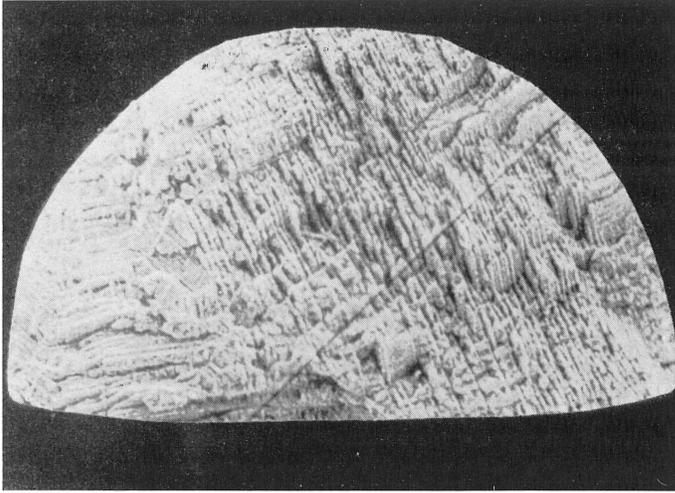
SEM micrograph of a retentive clasp assembly arm fracture surface. Fracture provoked by a 29 N load on a specially assembled apparatus.  $\times 50$ .
